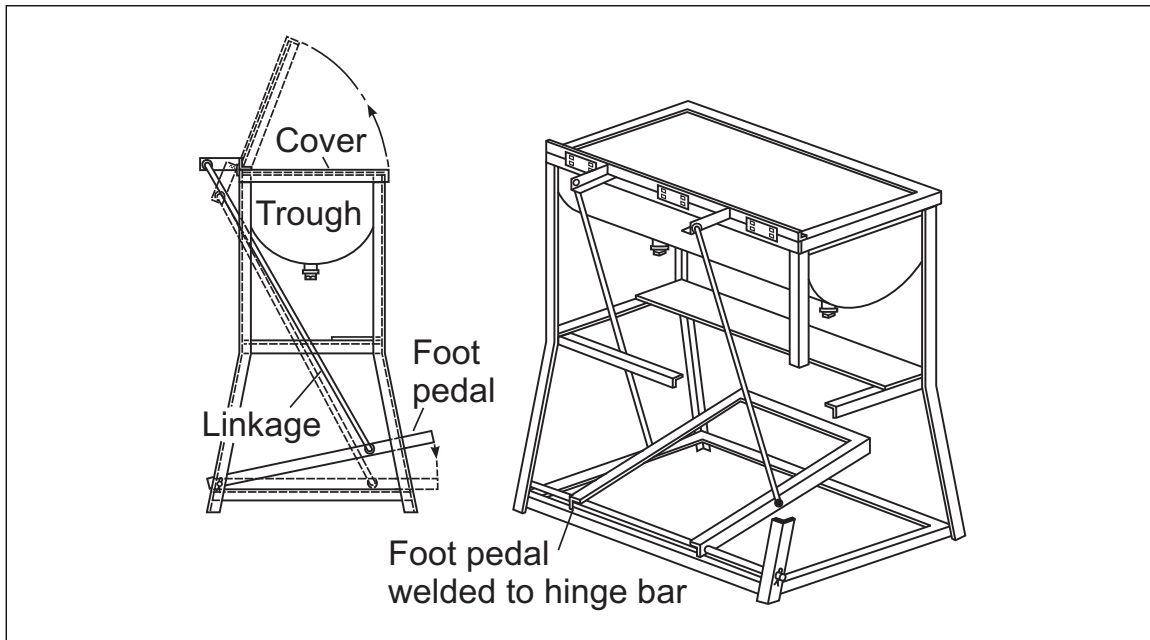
Cleaning tank with self-closing cover. Constructed of 1-in. (25-mm) angle iron, sheet iron, and $\frac{3}{8}$ -in. (10-mm) rods.
